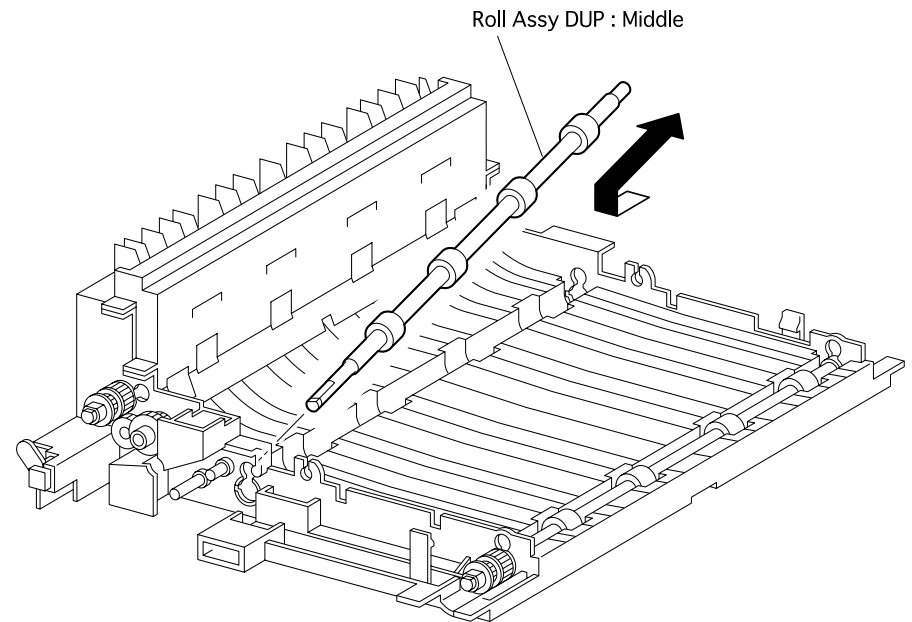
Roll Assy DUP: Middle Removal (3)
